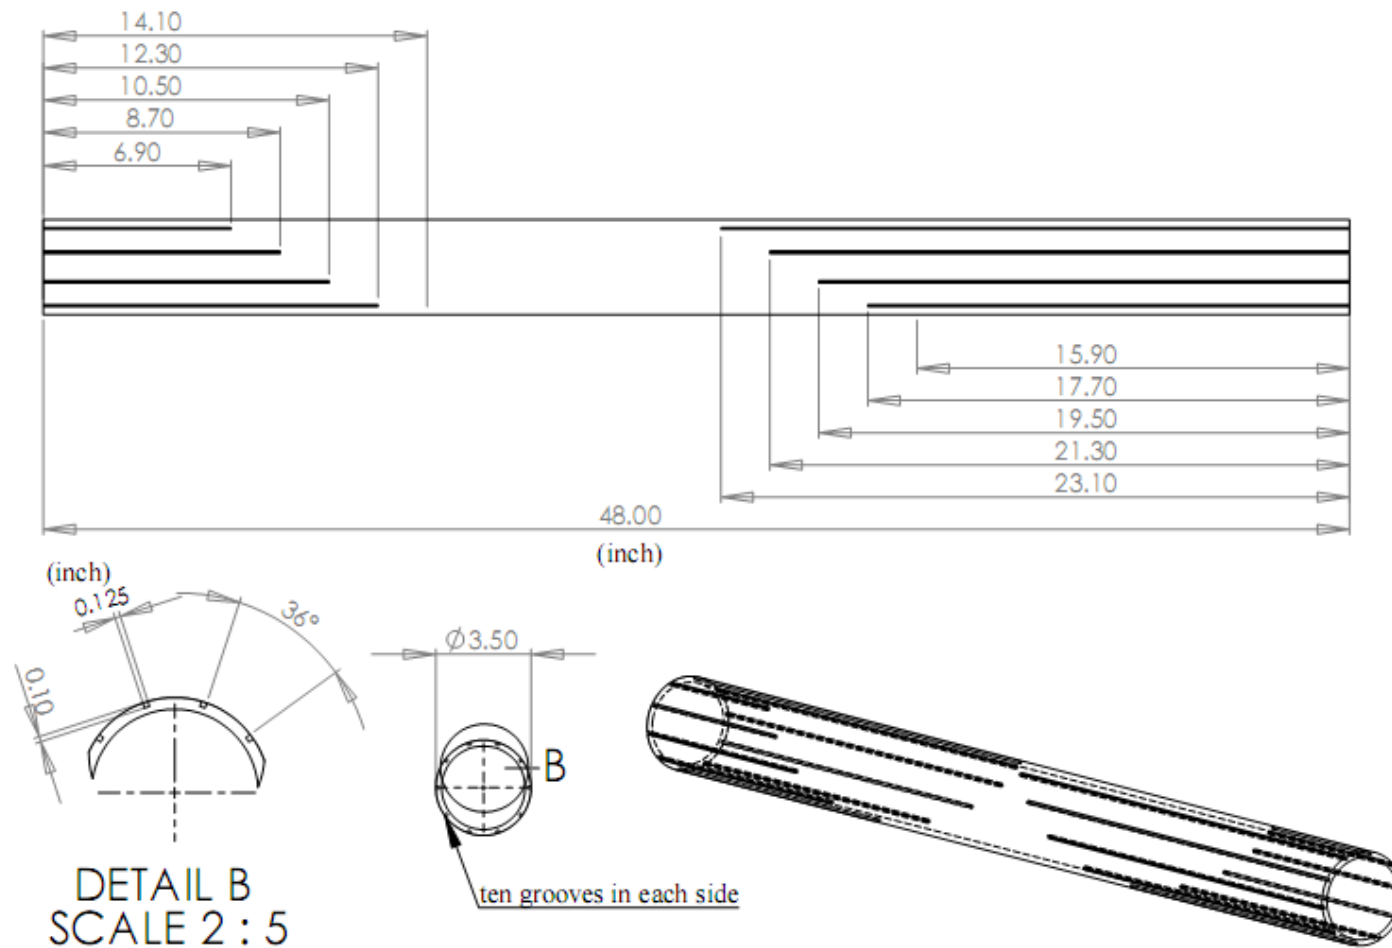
Details of the grooves machined on the Aluminum pipe exterior surface (unit: inch)
